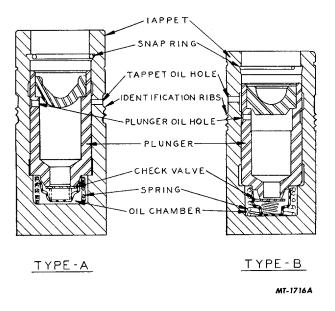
Sectional View of Hydraulic Tappets Showing Types "A" and "B"
